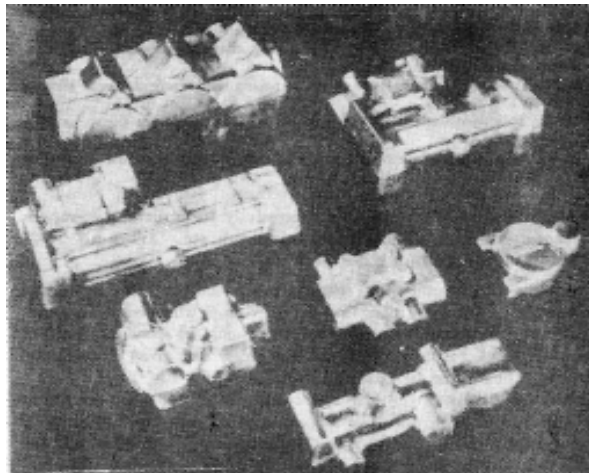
Press-forged Magnesium Hydraulic Parts
